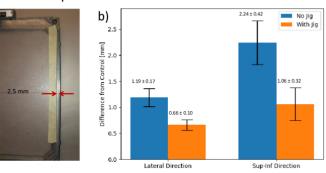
a) A photograph of a 25x25cm² electron frame exhibiting extreme bowing. b) Average frame bowing in the lateral and sup-inf directions for electron frames supported with/without the 3D printed jig during the block fabrication process.
